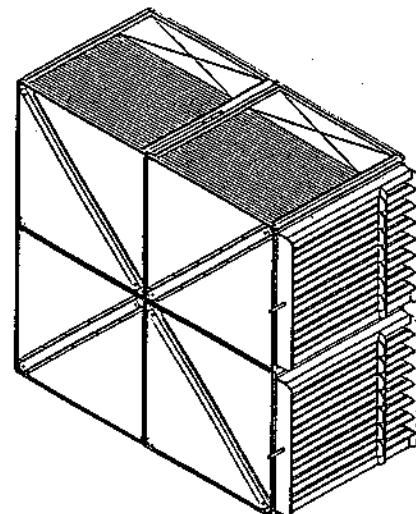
For sizes 200 and 240 a damper section is installed in front of each exchanger package.
